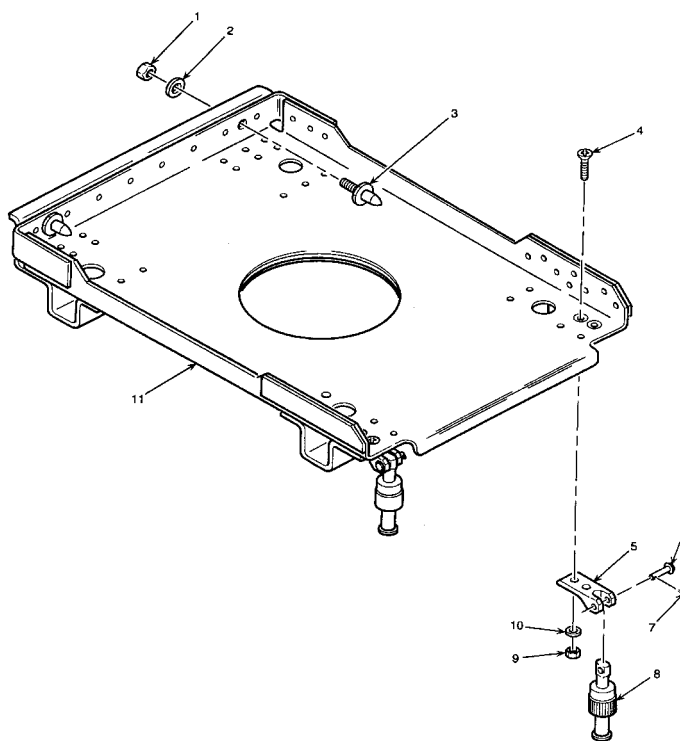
Electrical Equipment Rack, FMT 3234023-100
